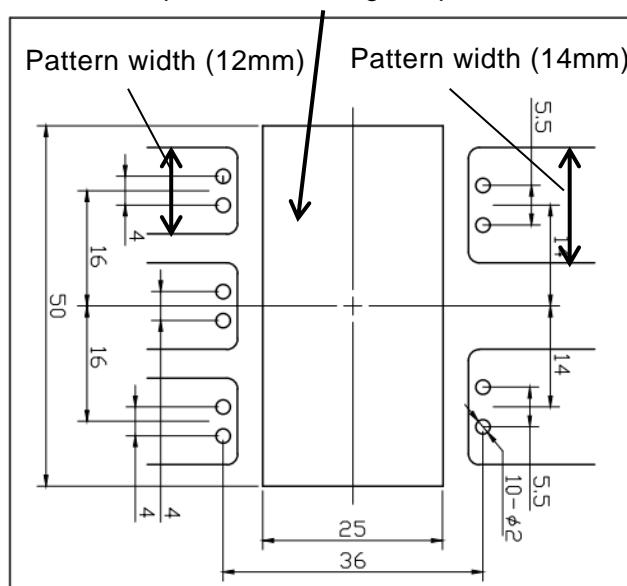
PCB Layout example (105μm thickness, double side PCB)
